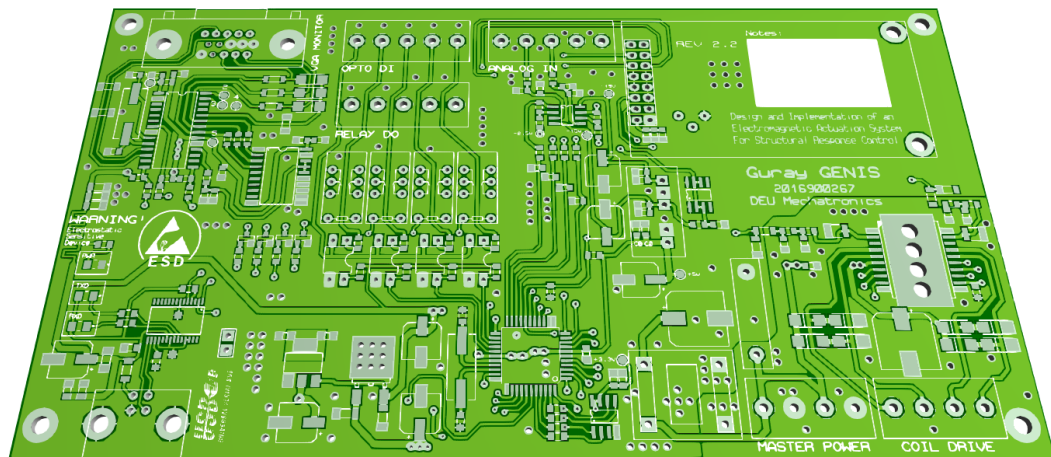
ARES PCB CAM software 3D visualization output of PCB
